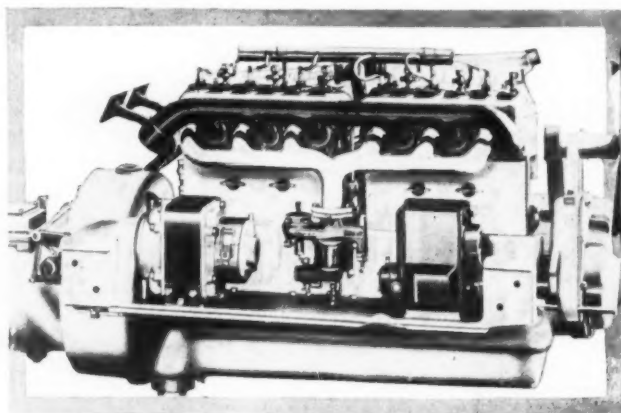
Application of Westinghouse starting and lighting equipment to Chandler engine
